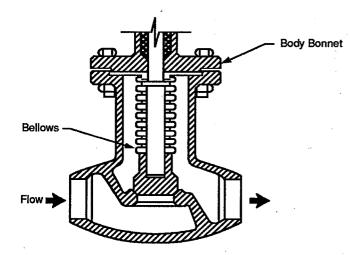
A bolted-bonnet bellows seal globe valve.
